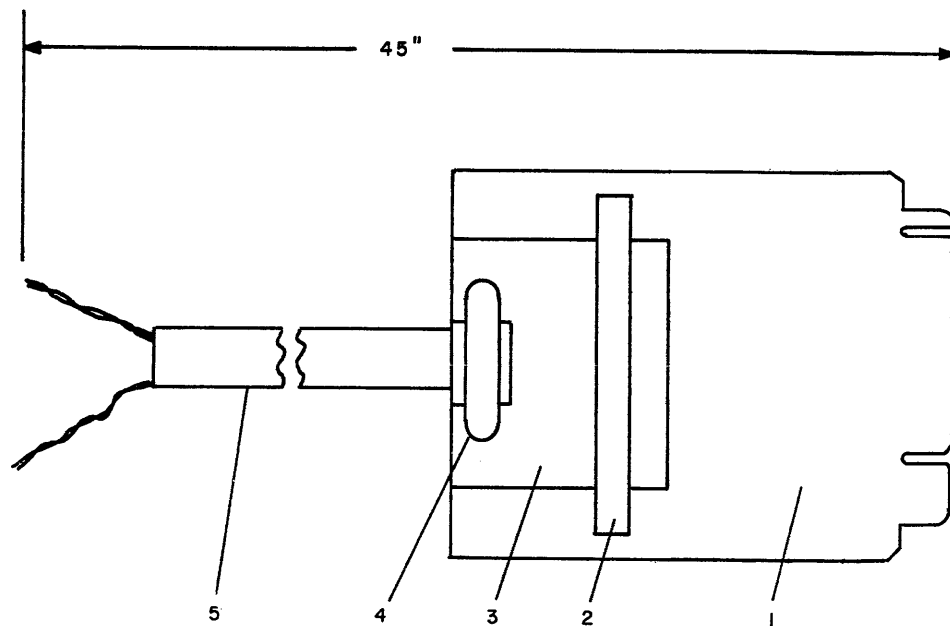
Cable Assembly, Special Purpose, Control Panel Cable No. 1, Types 316-0100 and 316-0110
